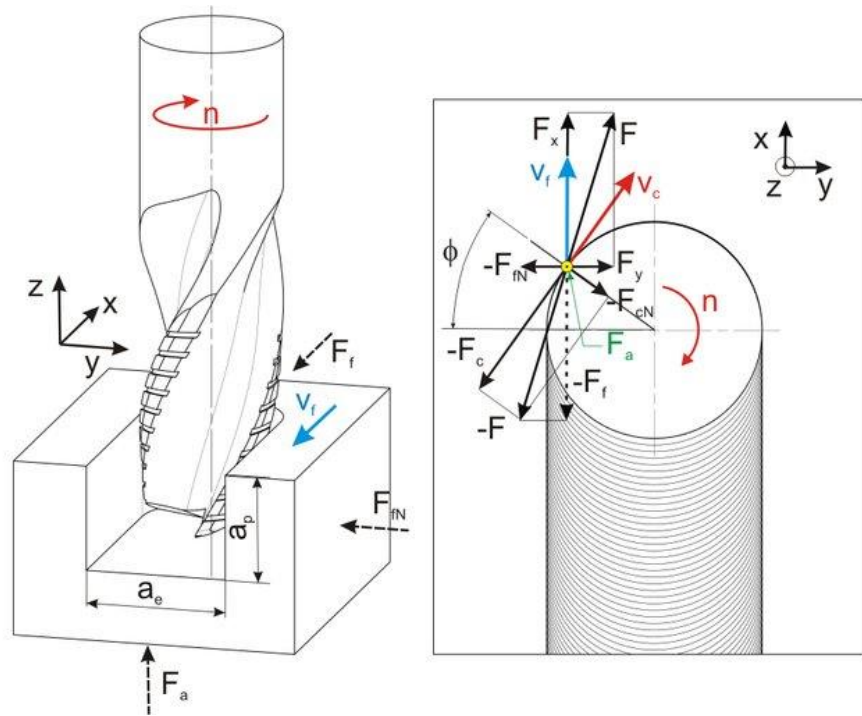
Milling cutting forces; in the work piece coordinates (left) and tool coordinates (right) [24]
